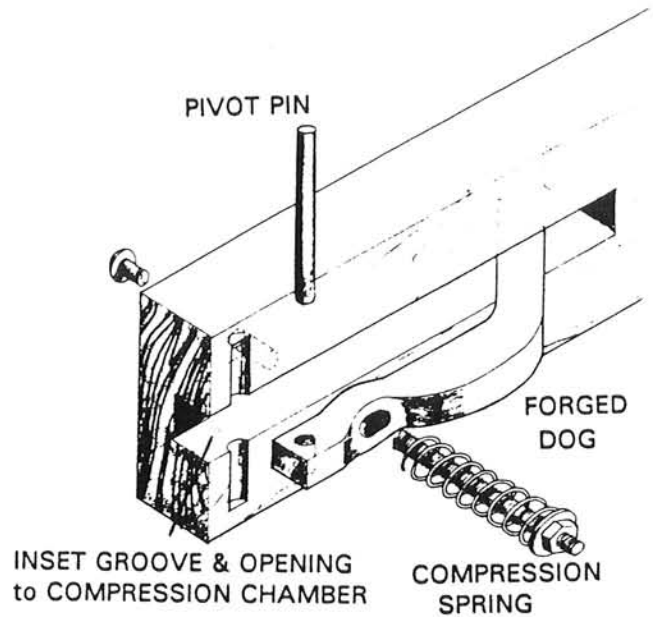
An exploded view of the "dog" mechanism for holding hay in its compressed position while the plunger is pulled back for added hay (Debra Reich, 12/92)
